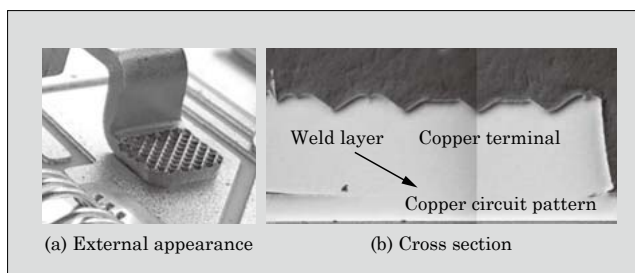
External appearance and cross-sectional view of ultrasonically welded terminal
